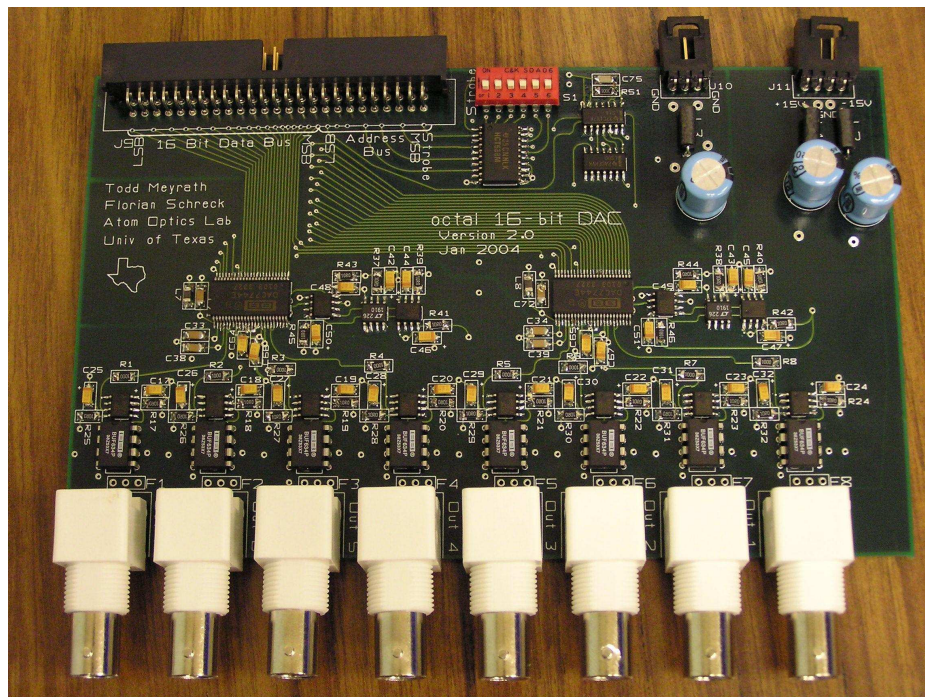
A completed board, lacking only heat sinks glued onto the BUF chips.
